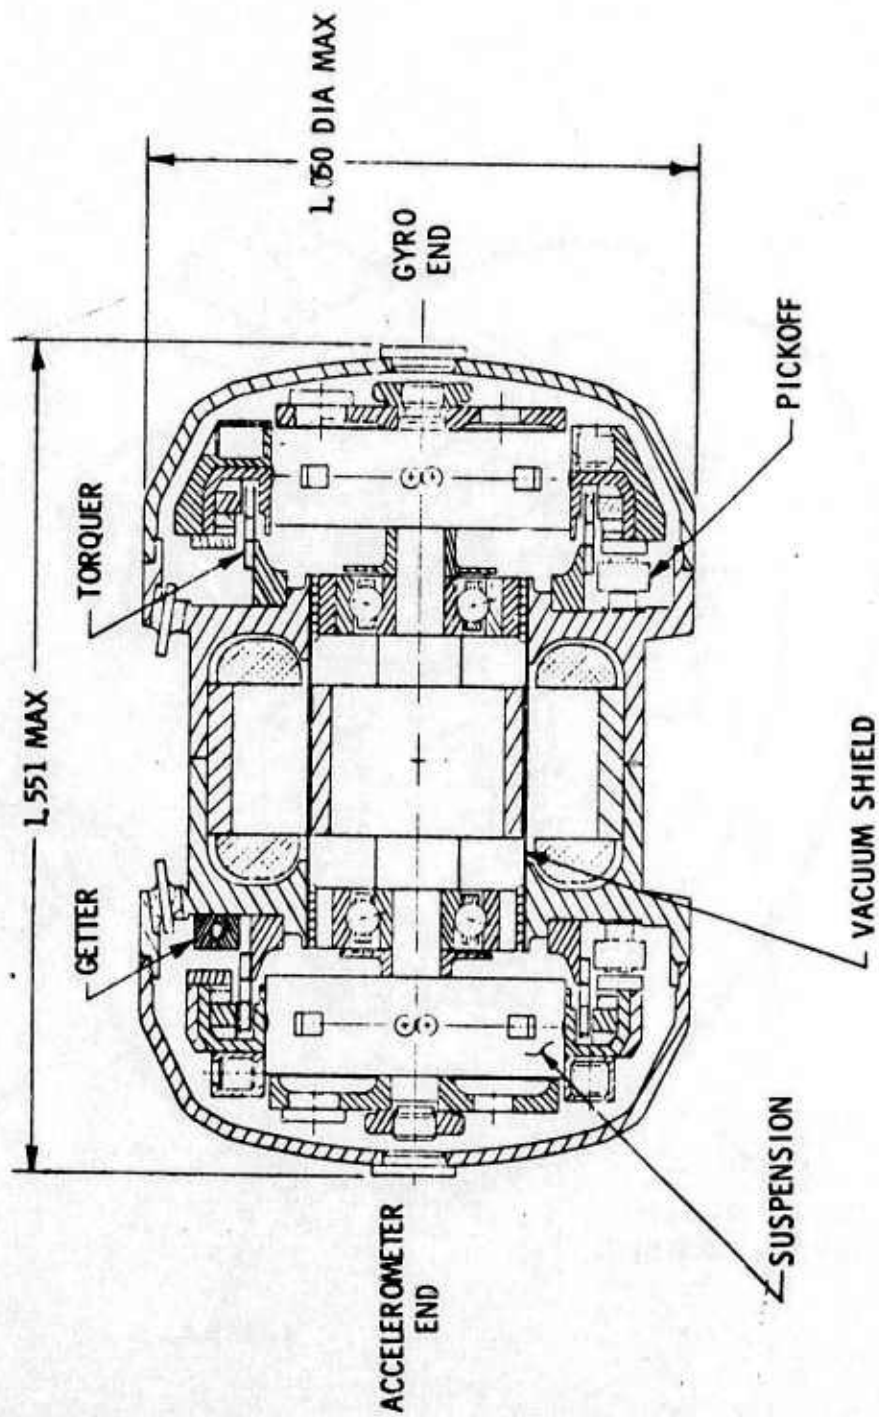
MULTISENSOR CUTAWAY VIEW
